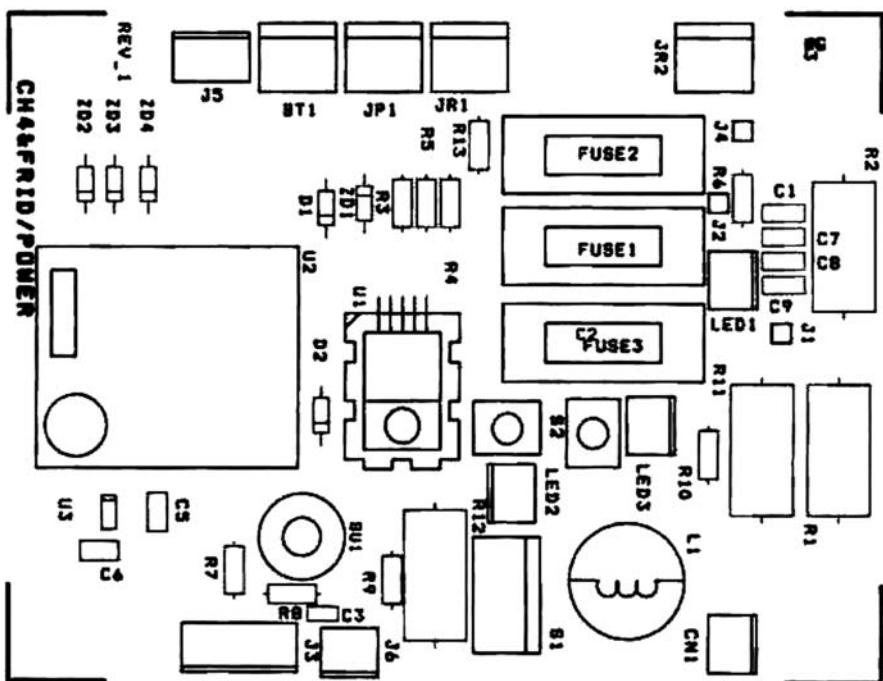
PCB component (top) layout of power and RFID unit of CH₄-monitoring device
